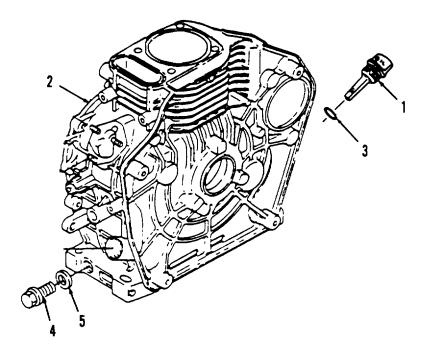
Oil Cap/Gauge Repair and Replacement.
